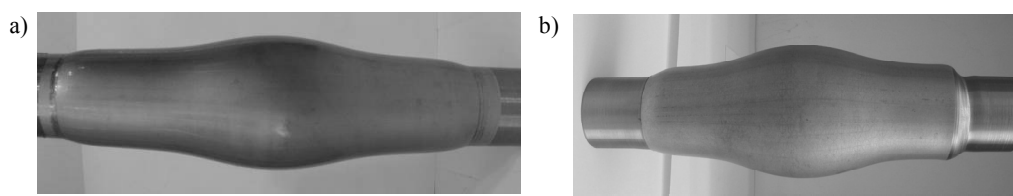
Comparison of hydroforming effects for tubes: a) tube without weld, b) laser welded tube
